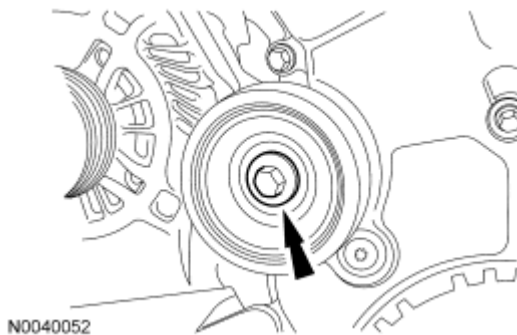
Locating Accessory Drive Belt Idler Pulley Bolt
